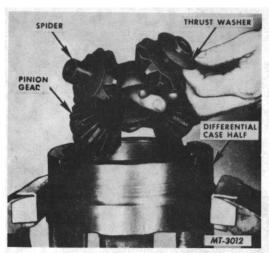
Removing Spider, Thrust Washers and Side Pinion Gears.
